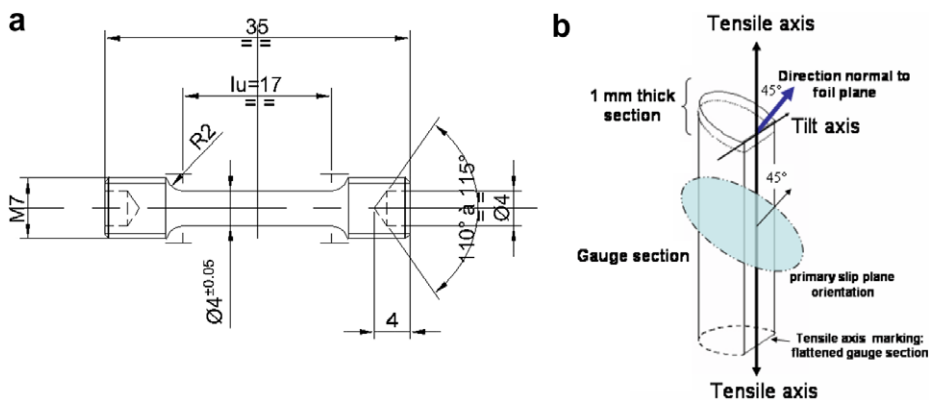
Tensile specimen geometry. (a) Specimen dimensions, (b) sketch of the specimen markings made before to thin foil cutting. The initially circular gauge section is flattened along the longitudinal direction and then cut at 45° from the tensile loading axis, using spark machining. This way, the (1 mm thick) sections cut parallel to the new oblique section include a short, rectilinear portion. After thin foil preparation, this rectilinear portion is aligned with the tilt axis of the specimen holder. Hence, in the TEM coordinate system, the tensile axis is at the same time perpendicular to the specimen holder tilt axis and 45° away from the foil plane.
